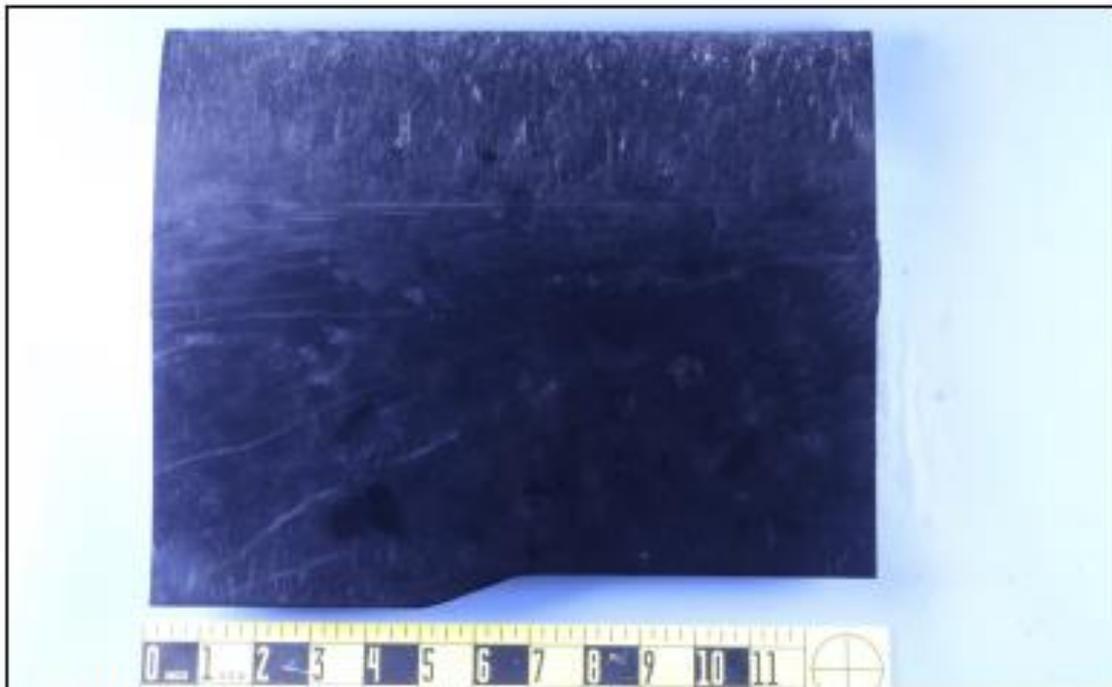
Reverse view of the main rotor blade section, shown in Figure 18.
